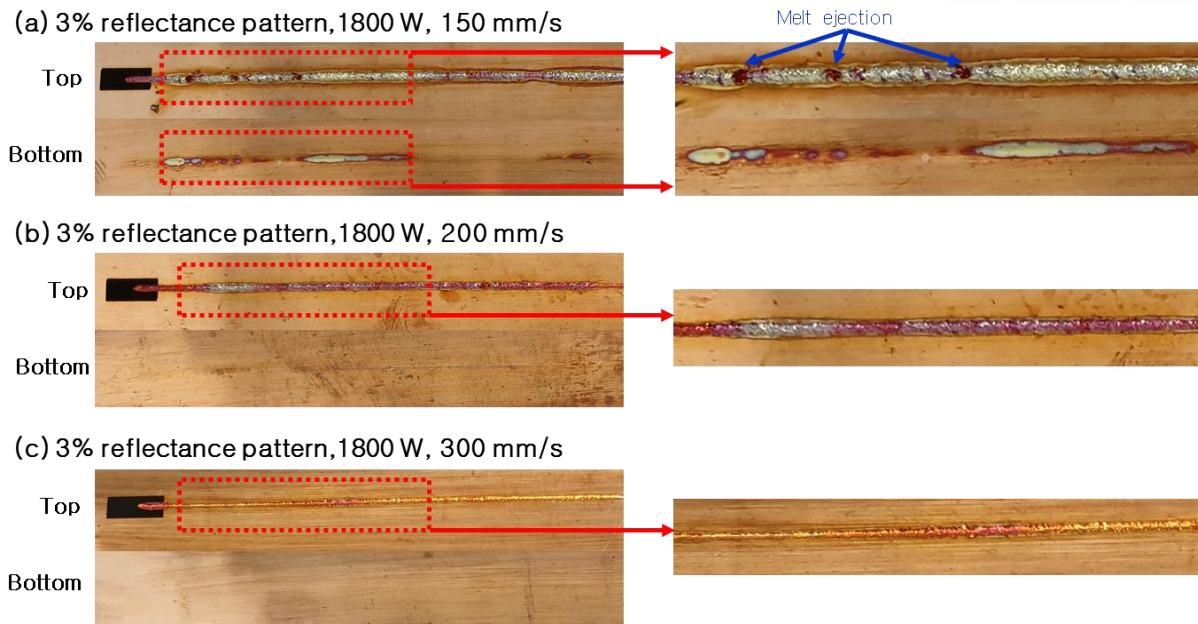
Top and bottom view of welded copper surface using 3% of reflectance pattern and power of 1800 W and scanning speed of (a) 150 mm/s, (b) 200 mm/s and (c) 300 mm/s
